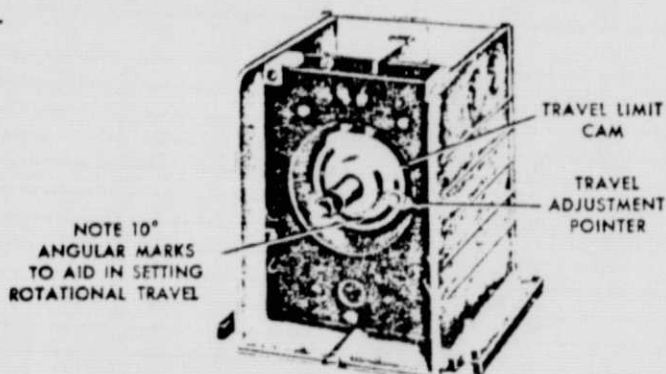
Internal view of Series M40A motor actuator showing adjustable travel limit cam.
